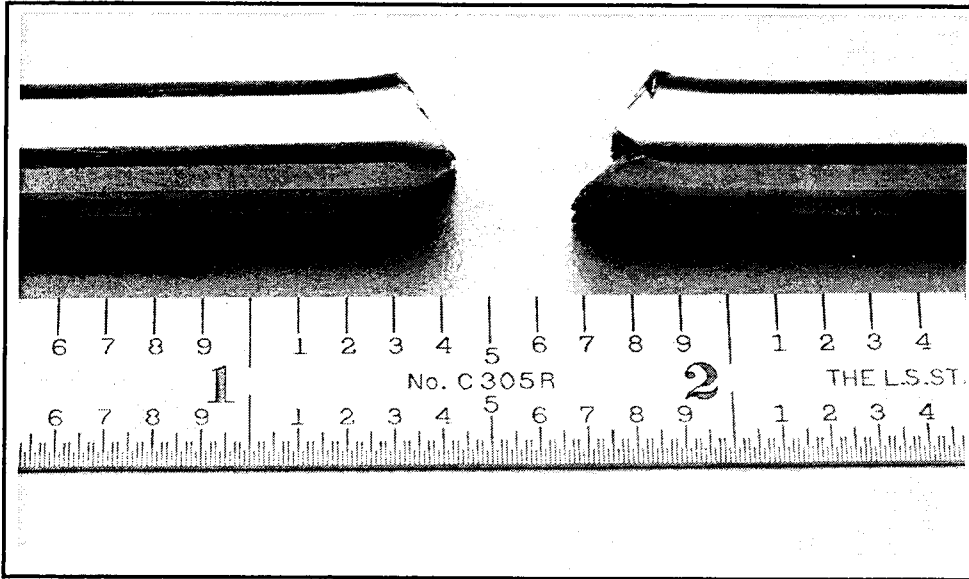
Photograph of a typical severed bolt showing the cut and the fractured side of the both fractured pieces.
